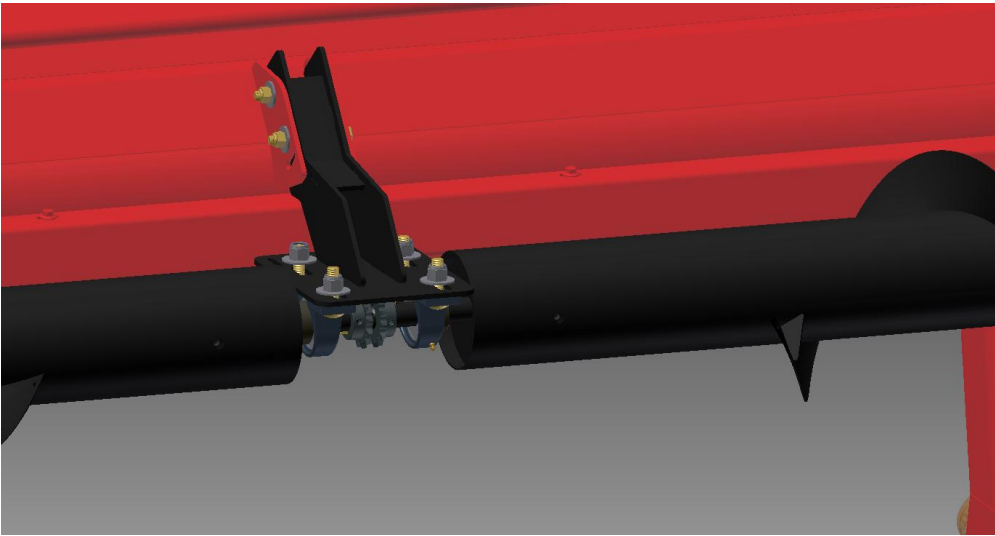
CENTER BEARINGS BOLTED TO CENTER BEARING MOUNT WITH 5/8 CARRIAGE HEAD BOLTS.
